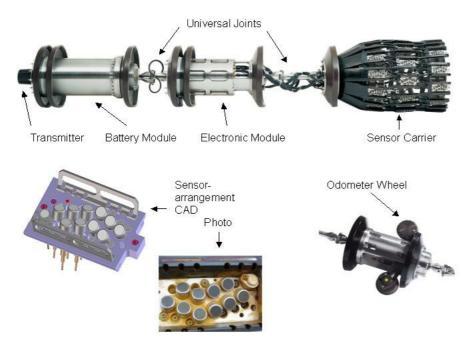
Layout of an ultrasonic in-line inspection tool (crack detection)
